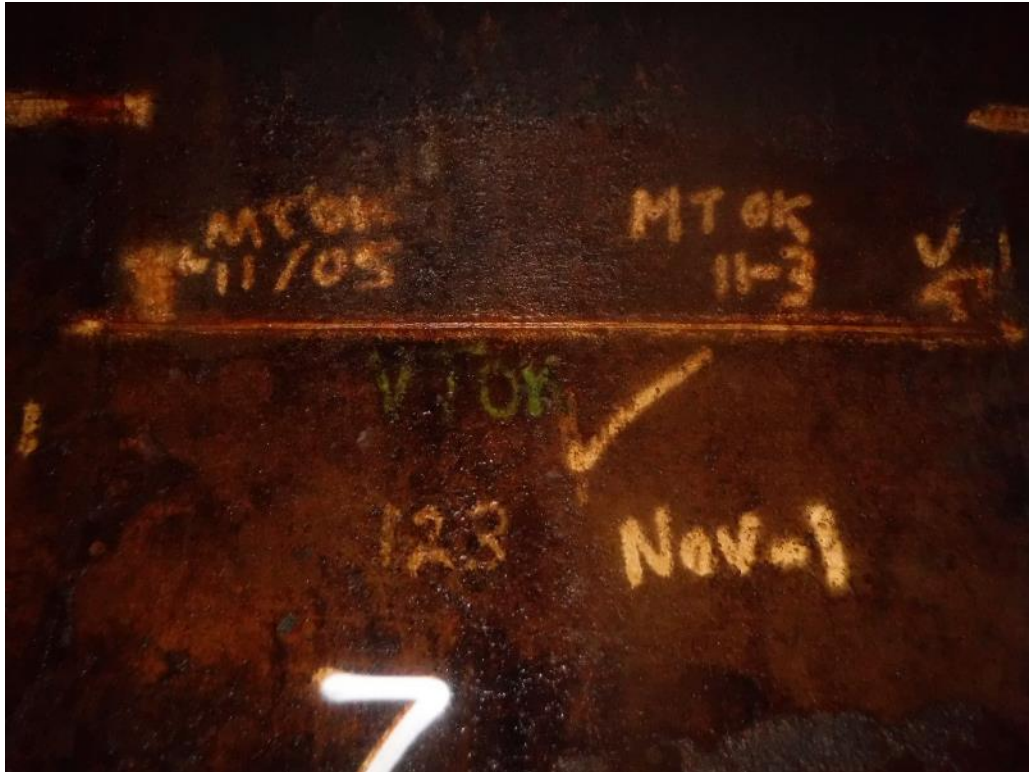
PREVIOUSLY REPAIRED AND TESTED WELD – CAN 7
